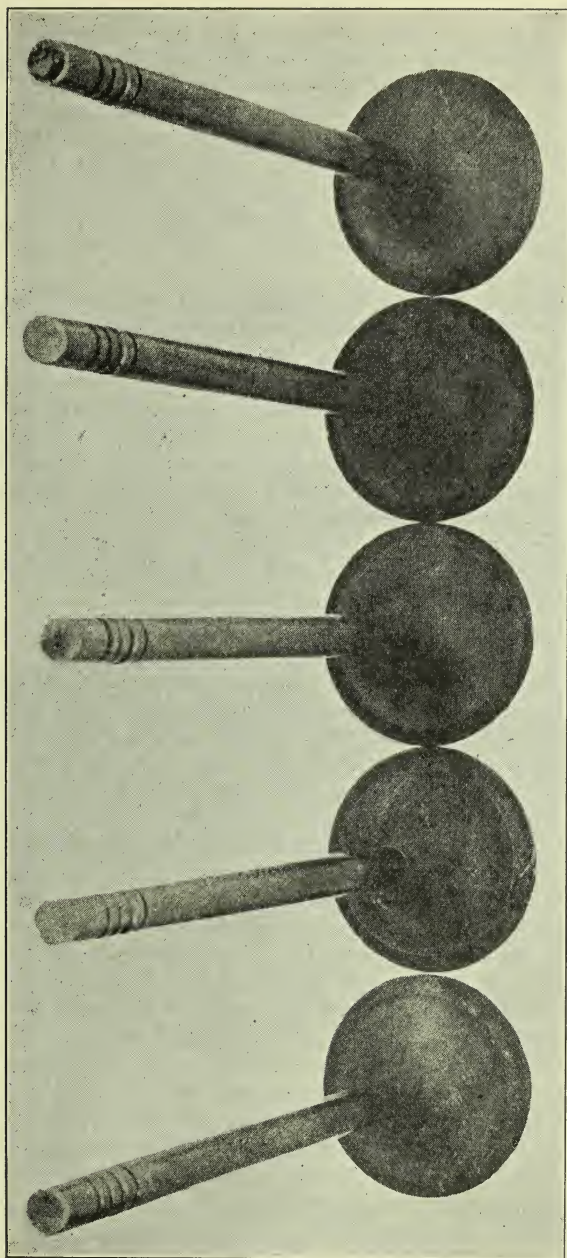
VALVES OF THE SAME ENGINE, FROM WHICH THE BUSHINGS SHOWN IN FIG. 9 WERE TAKEN, AFTER IT HAD BEEN SUBJECTED TO A 50-HR. TEST WITH A MODIFIED VALVE-GEAR
